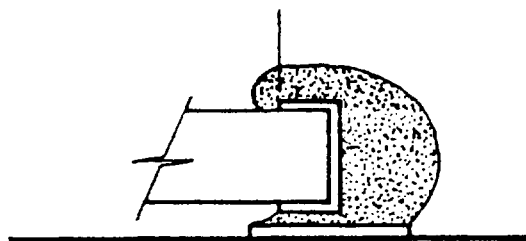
Excessive solder - parts encased (see 4.23.3.2).
